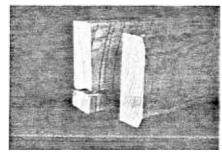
Splitting in board (left) cut from cant with wane-free lower corners. No splitting in board (right) cut from cant with wane between the bottom and side surfaces.
